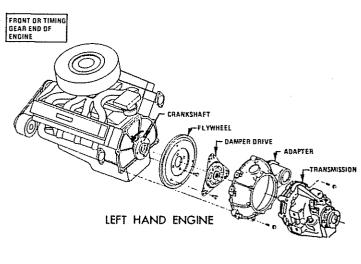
TYPICAL FLYWHEEL END INSTALLATION
